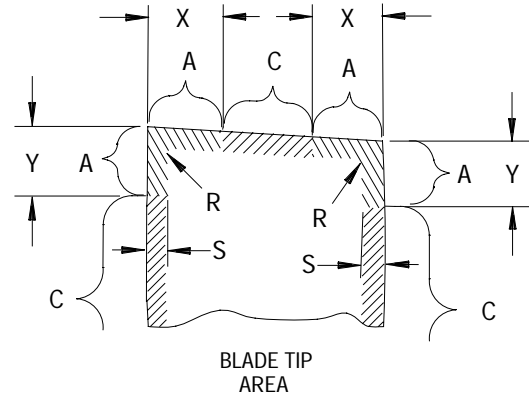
First, Second, and Third Stage Compressor Rotor Blades - Repairable Limits After Blending (Sheet 3 of 4)
